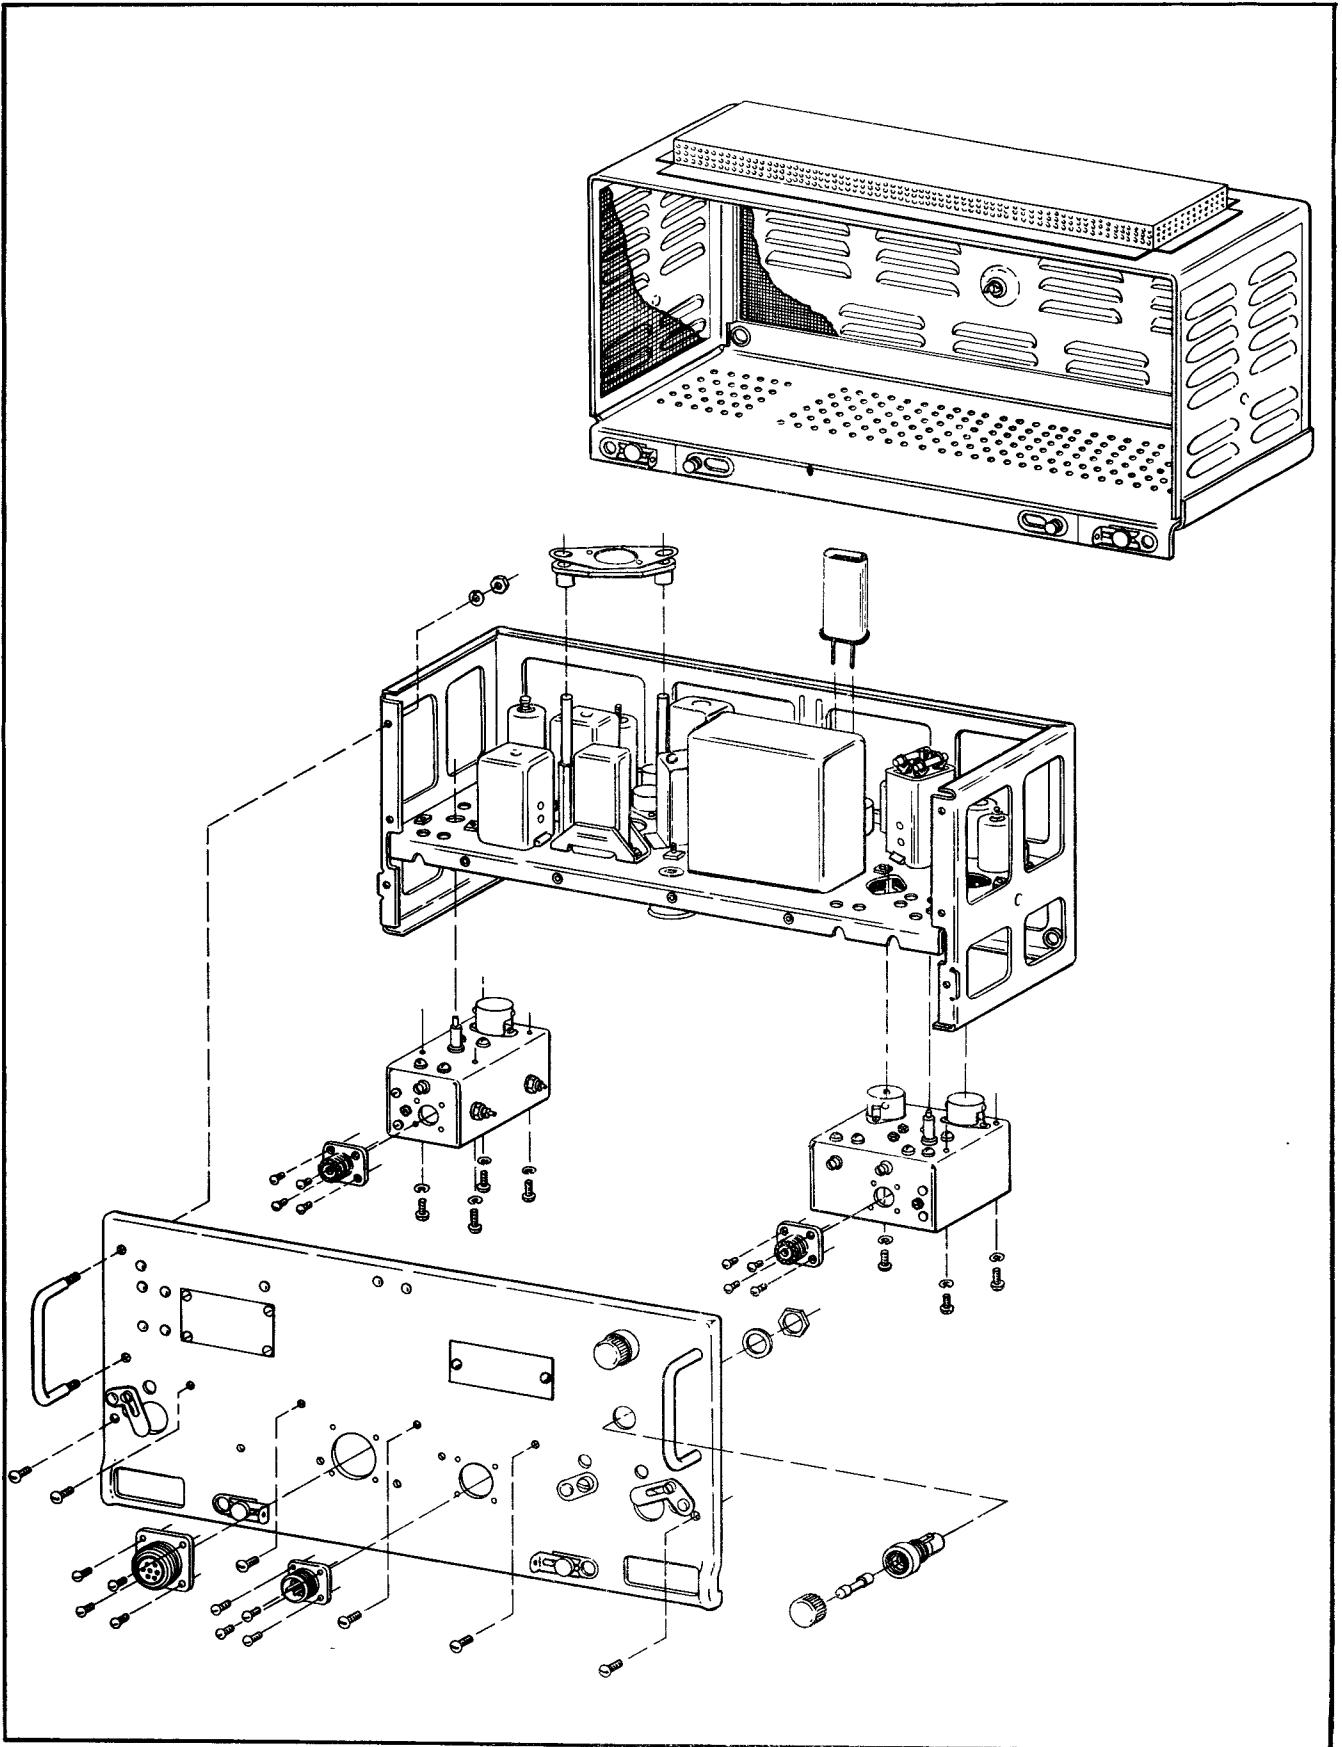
Radio Receiver and Transmitter BC-788-E, Exploded View:
